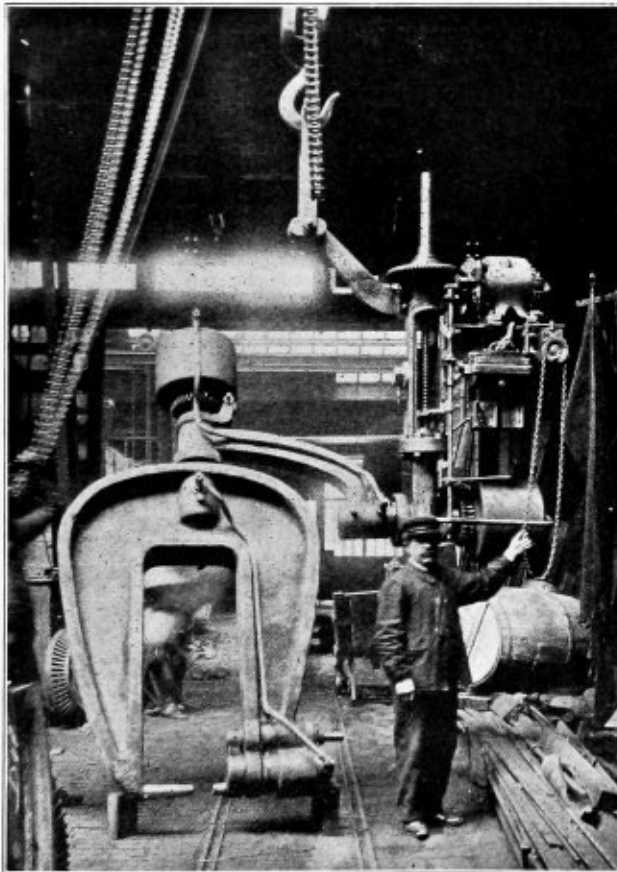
PORTABLE ELECTRIC-HYDRAULIC RIVETER.
